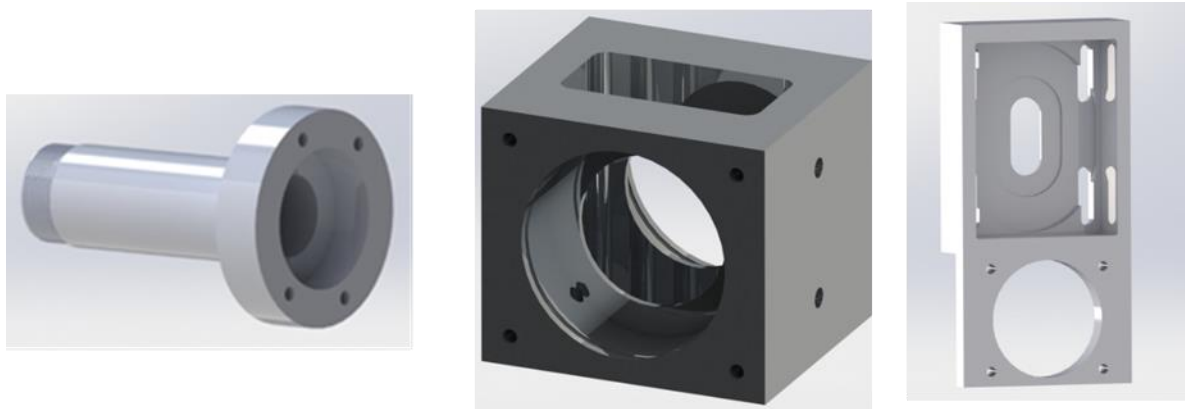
a) Bearing shaft b) Bearing house c) the fixture for holding the motor and connecting motor to House bearing
